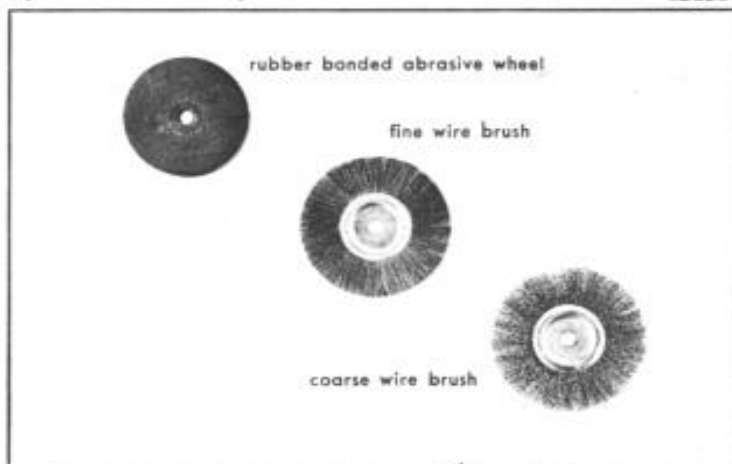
Wire brushes and rubber bonded abrasive wheel
